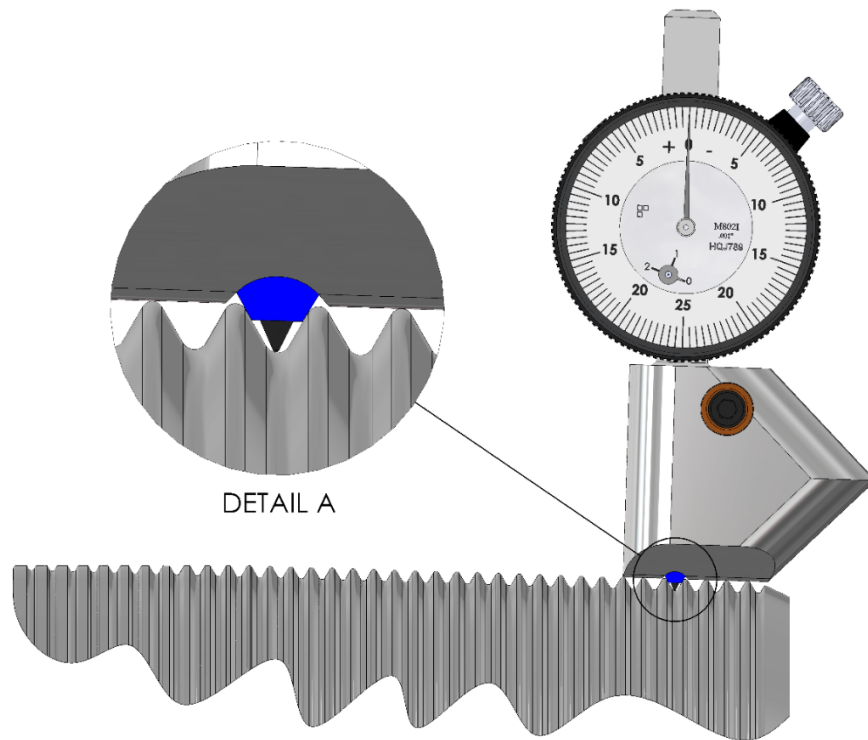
External Thread Height Gauge on Pin Threads (Round Thread Height Gauge)
